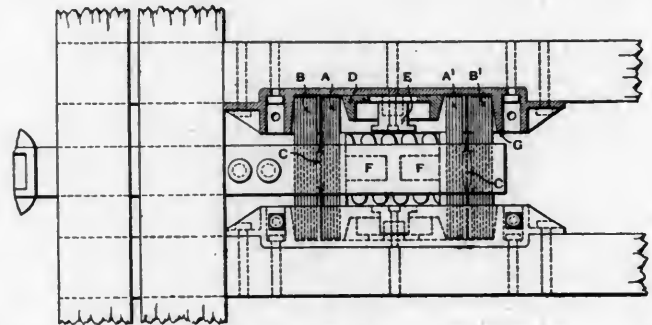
DETAILS OF THE WAUGH DRAFT GEAR, SHOWING ALL PARTS AT REST.
